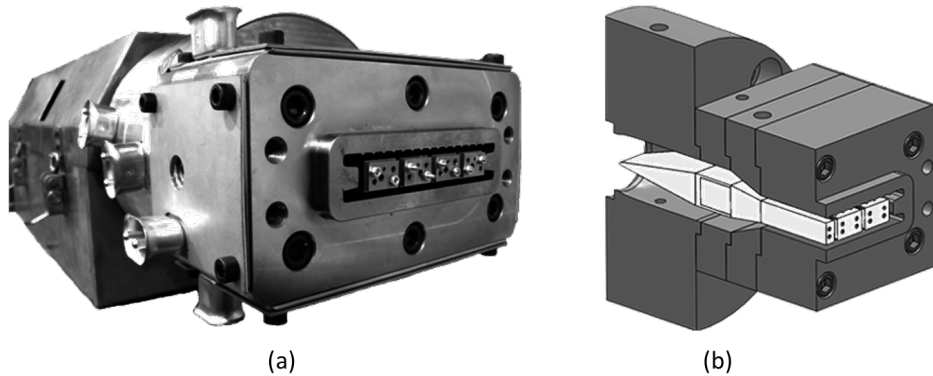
Extrusion die used for the production of WPC: (a) actual production tool and (b) cut view of the tool geometry.
